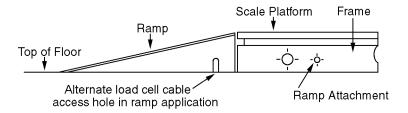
d EZ-Lift (with ramp) Load Cell Cable Access Locations
